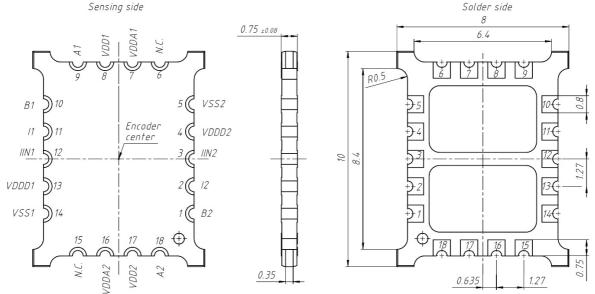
Dimensions of IT3402 encoder on encoder-holder type B. The "Encoder center" must be centered with respect to the "Readout radius" of the Codewheel (Fig 4)
